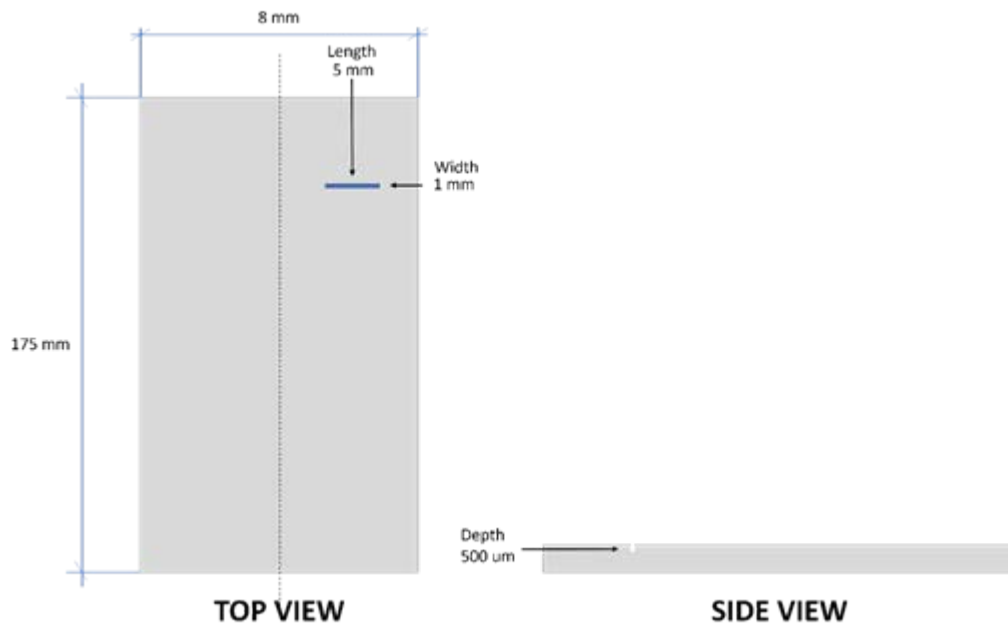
Dimensions of the steel sheets used to emulate cracks in the laboratory setup
